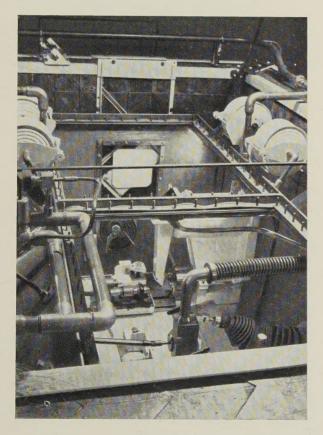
Internal View of Lead-Shielded Box with Lathe Used for Welding of Cylindrical Cans.
